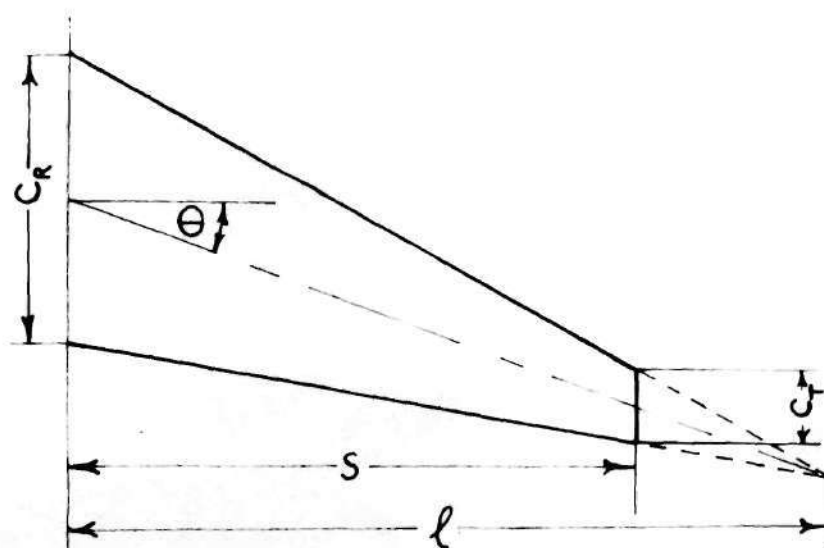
DIMENSIONS OF THE TAPERED PLATE.
